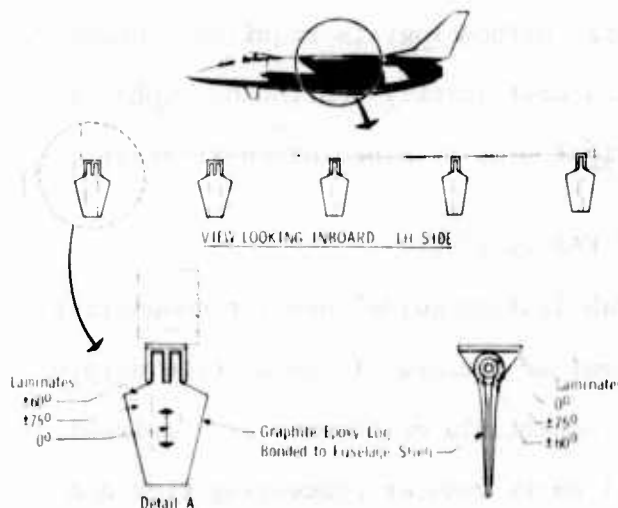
Wing/Fuselage Joint can Use Fail-Safe Lug Fittings
